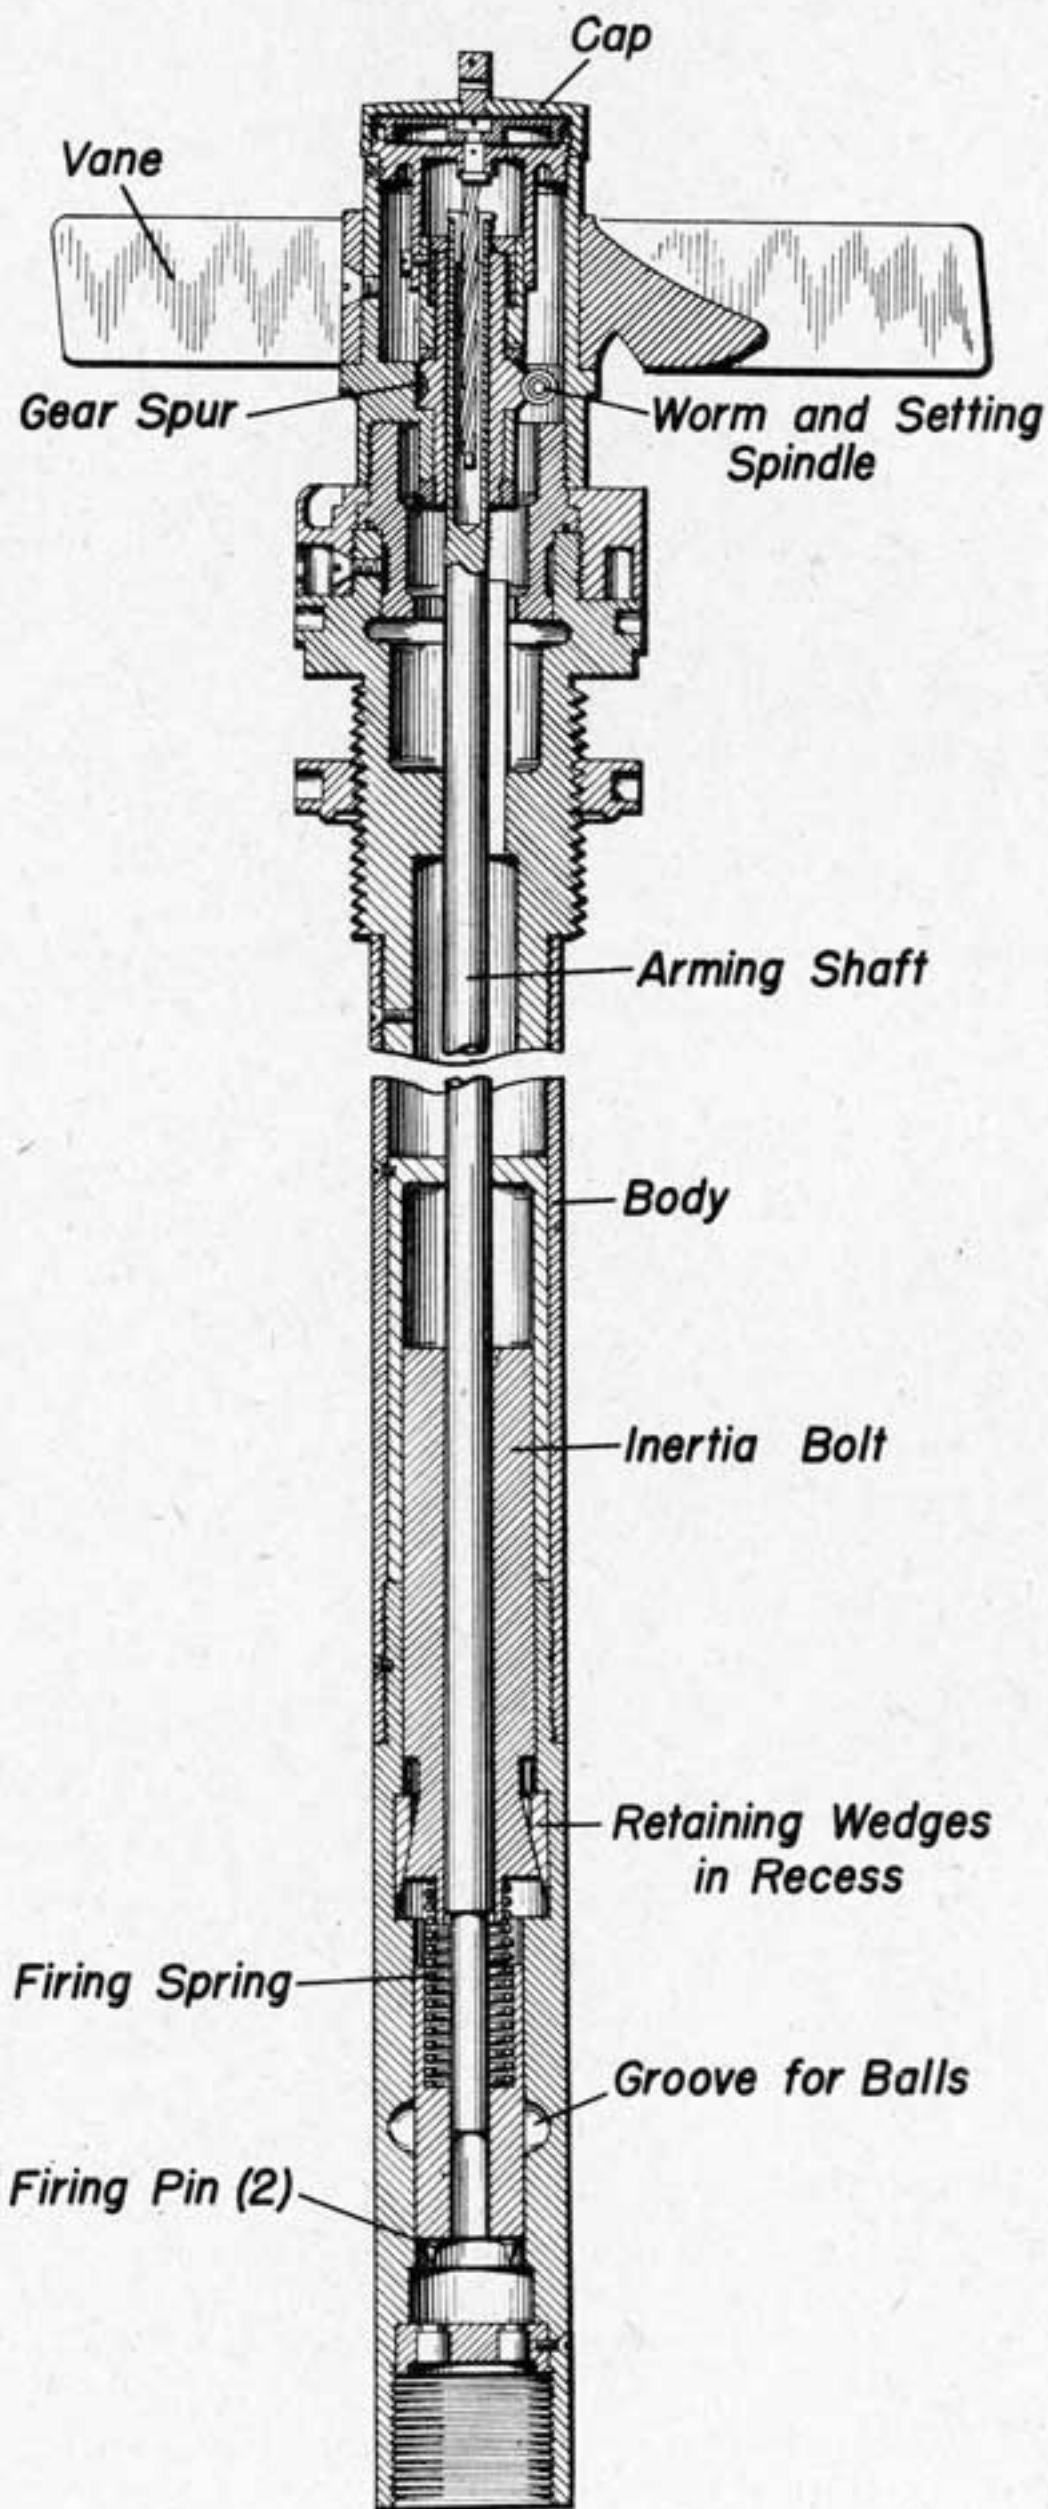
160/C.S. Depth Bomb, Tail Fuze, Armed Position, Sectional View
